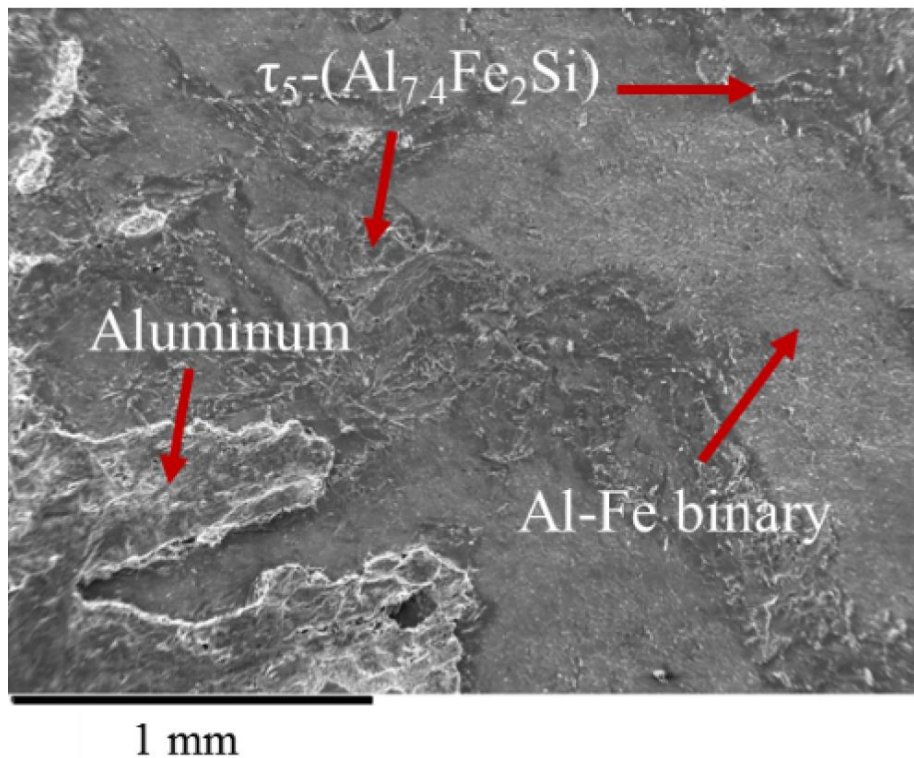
Fracture surface of steel/aluminium bond [98].
